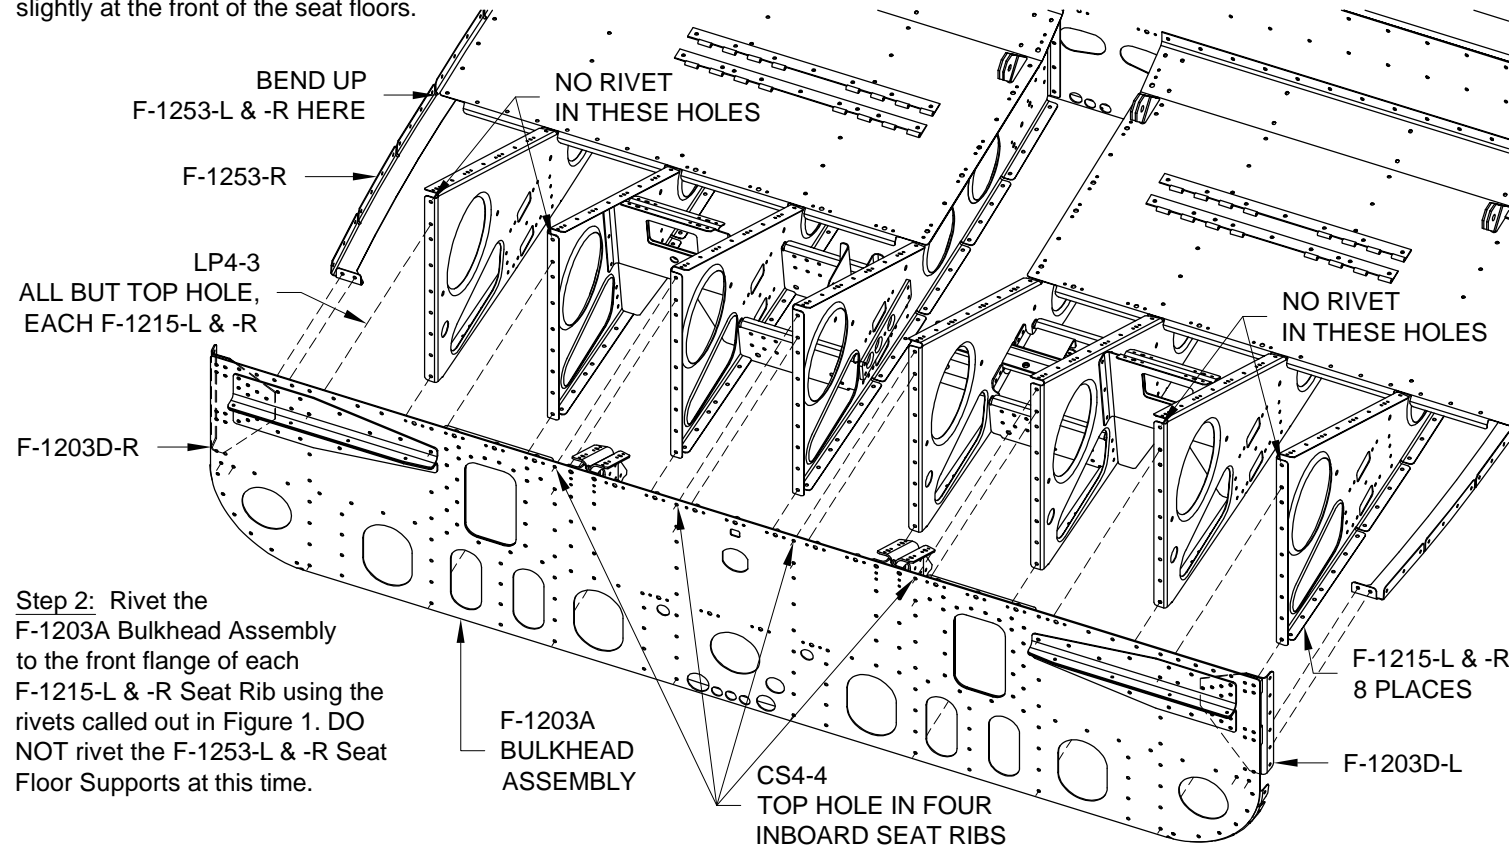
F-1203A BULKHEAD ASSEMBLY
